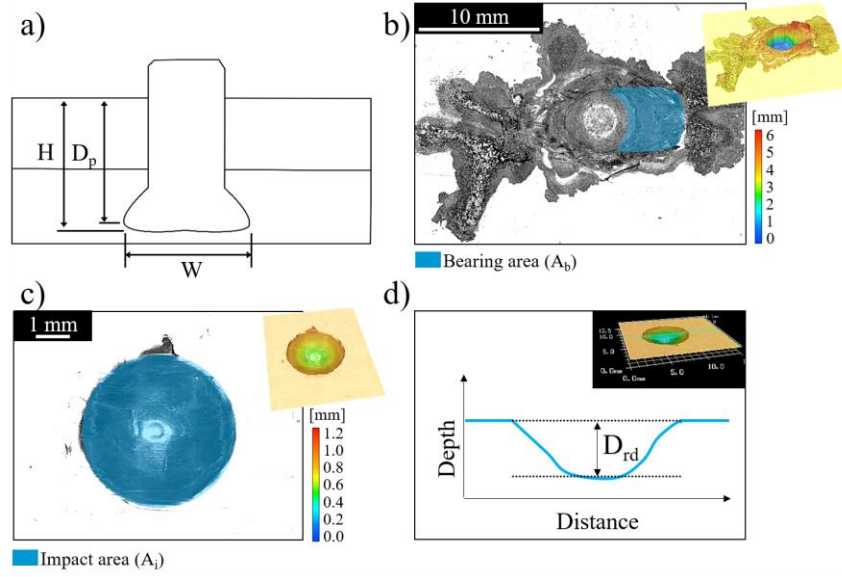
a) Schematic illustration of a single overlap friction riveted joint showing geometrical features of the anchoring zone (H , D_p , and W); b) example of the bearing area (A_b) measurement from a joint fracture surface, showing the laser intensity image along with the 3D display of the fracture; c) example of the impact area (A_i) measurement for 5 J impact energy, showing a laser intensity image along with the 3D display used to measure d) the residual dent depth (D_{rd}).
